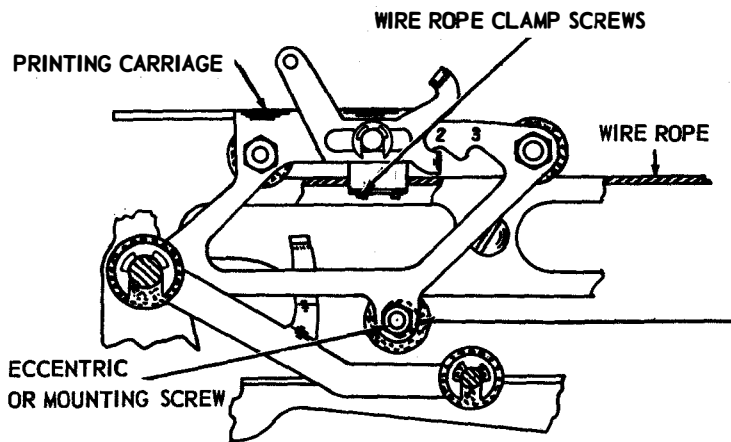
Automatic Typewriter, Right Margin and Decelerating Slide Mechanism, Front View
